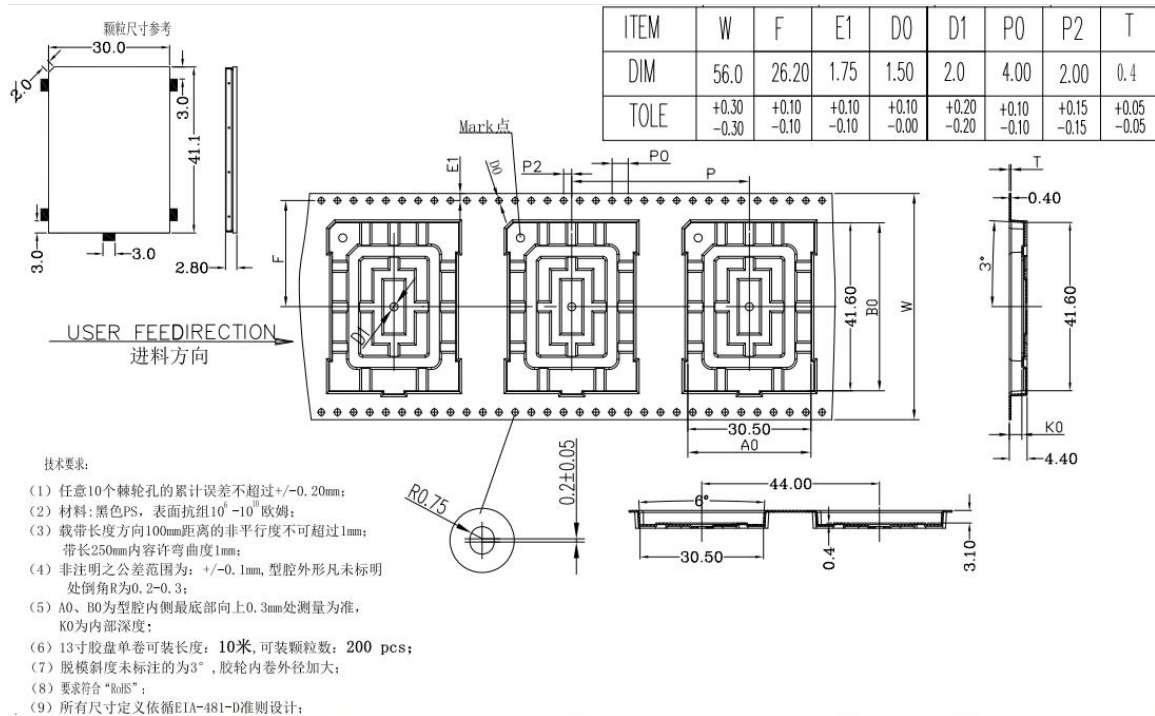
Dimensional Drawing of the Conveyor Belt (unit:mm)
